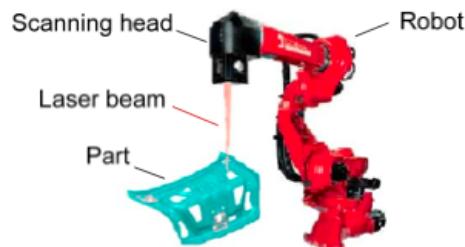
Remote Laser Welding (RLW) system
